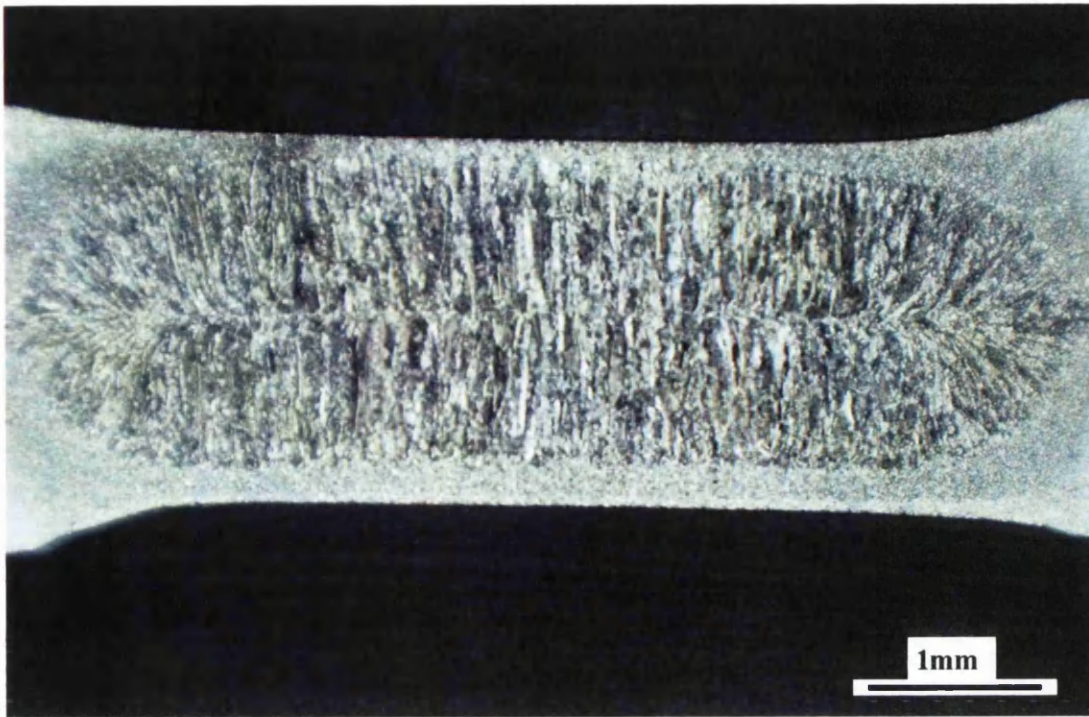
Macro of $5\sqrt{t}$ spot weld formed in LC
